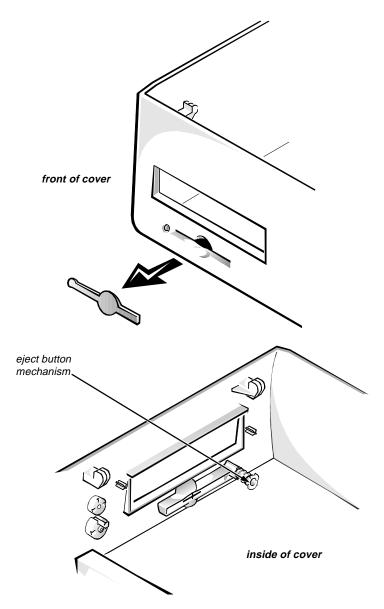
3.5-Inch Front-Panel Insert Removal
